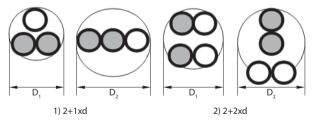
Single-layer steel cord with variable geometry of wire arrangement on a lay length
